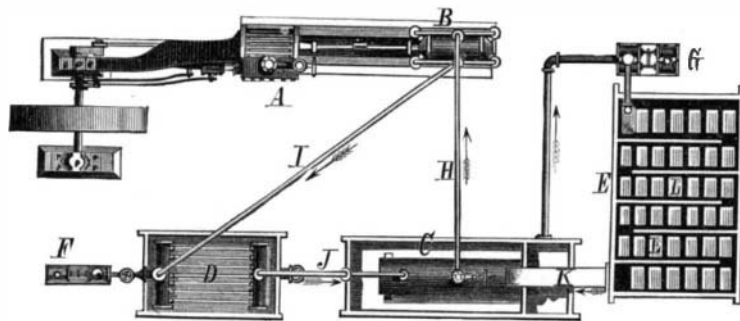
GENERAL PLAN OF ICE-MAKING MACHINE.
